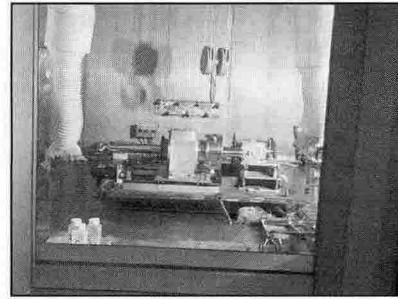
Cut and dismantle 02M-02K by capsule cutting machine in M2 Hot cell.
